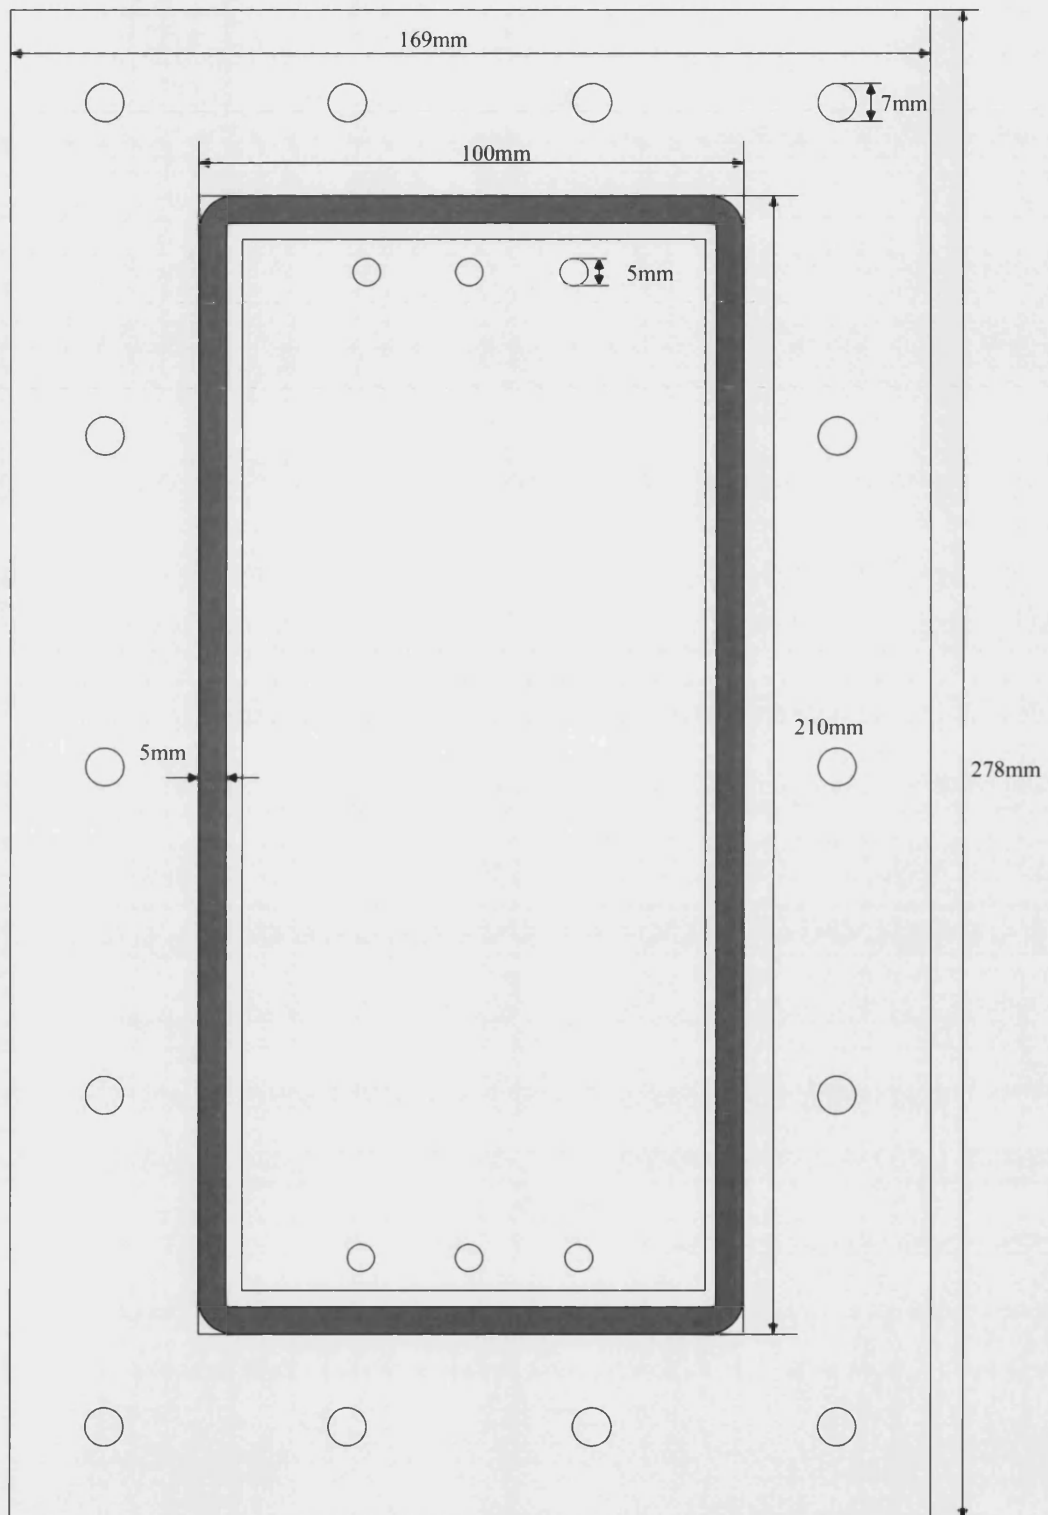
The graph of top stainless steel plate of single flatsheet module (shown at actual size)
